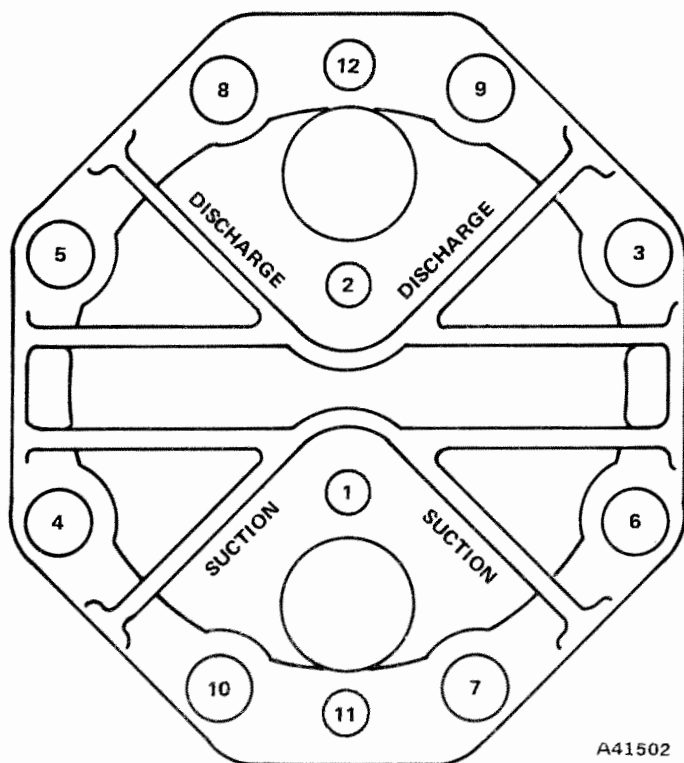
A-14 Compressor Head Capscrew Tightening Sequence
